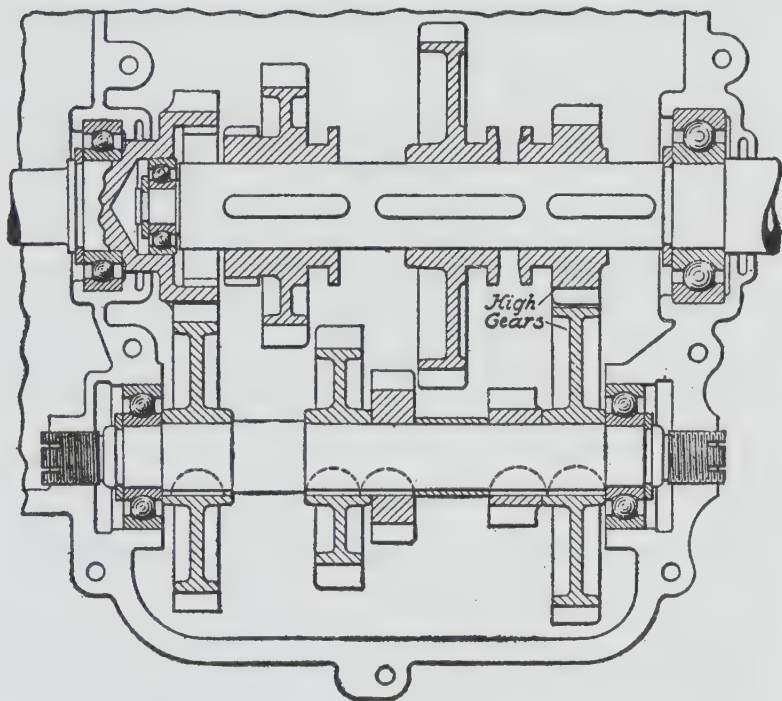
LAYOUT OF WINTON CHANGE GEAR WITH GEARED-UP FOURTH SPEED.
